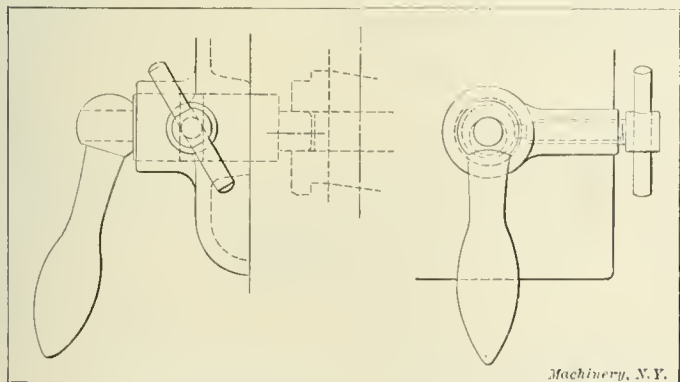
Clamping Screw with End entering Groove for Clamping Stud
